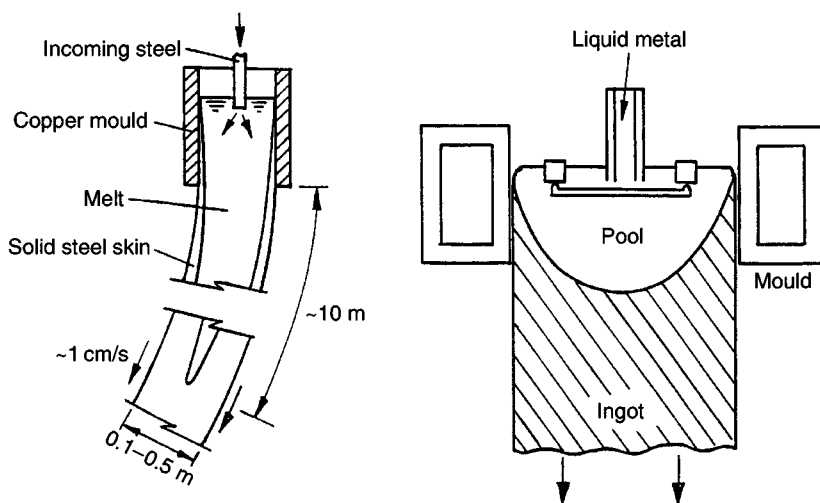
(a) Casting of steel; (b) casting of aluminium.
